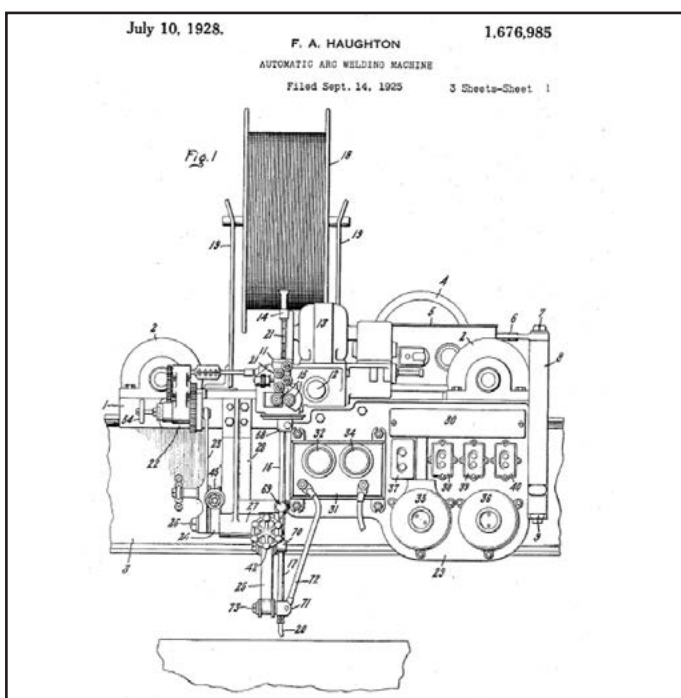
Automatic welding machine according to US patent no. 1,676,985 [6]
